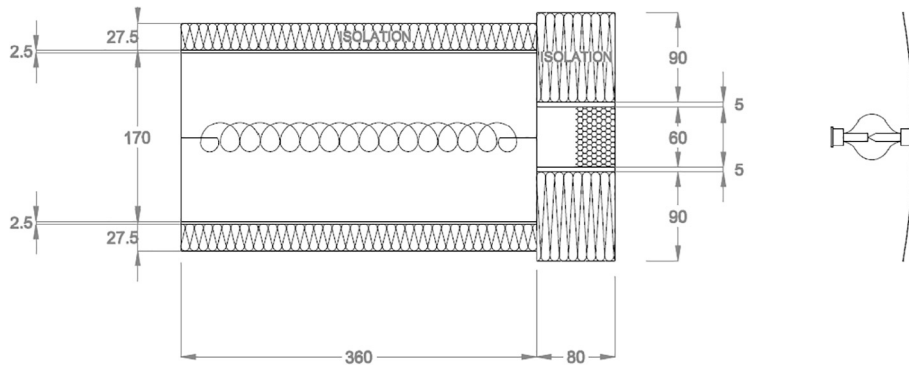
Sketch of the receiver and the heat exchanger with dimensions in mm.
